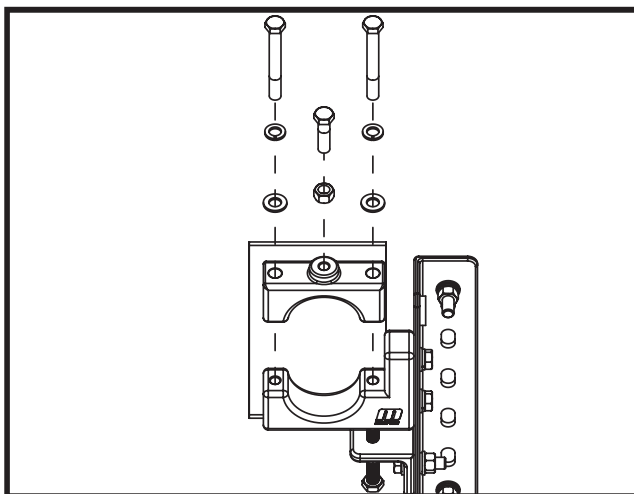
Martin® P2 Secondary Belt Cleaner HD Far Bolt Tensioner Clamp Block Hardware
